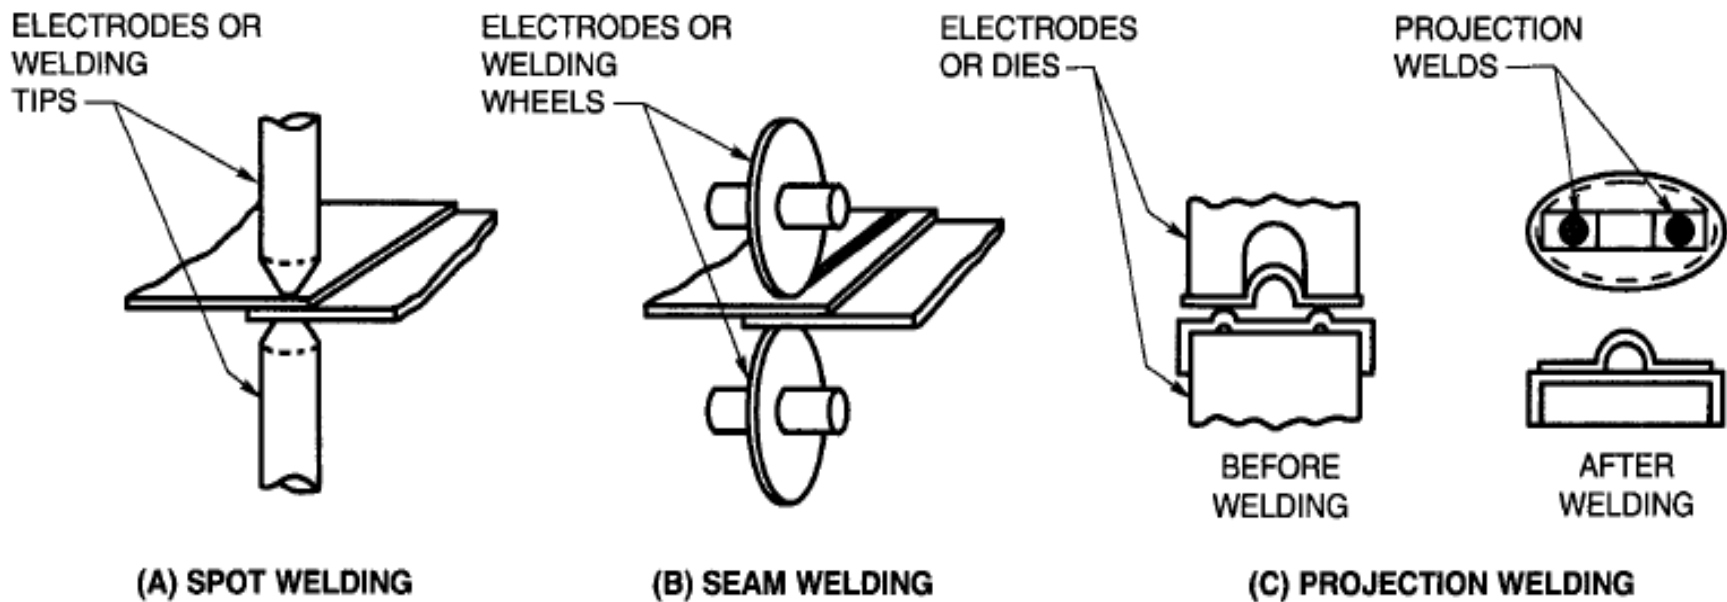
Simplified Diagrams Showing the Basic Processes of Spot, Seam, and Projection Welding
